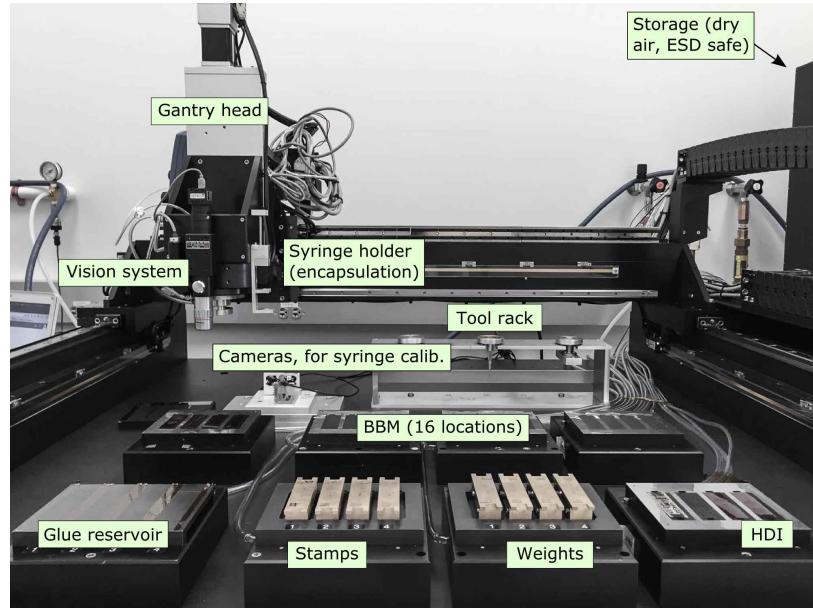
Photograph of a gantry used for gluing and encapsulation showing different parts of the set up and tools.
